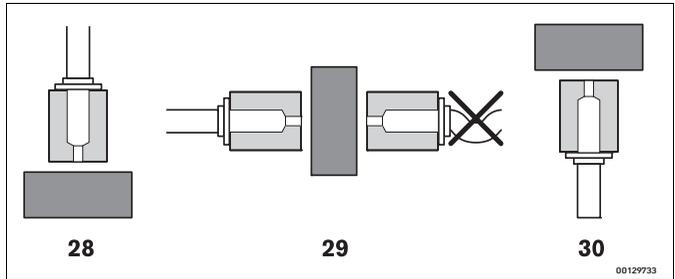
Possible mounting positions for the dynamic pressure nozzles
